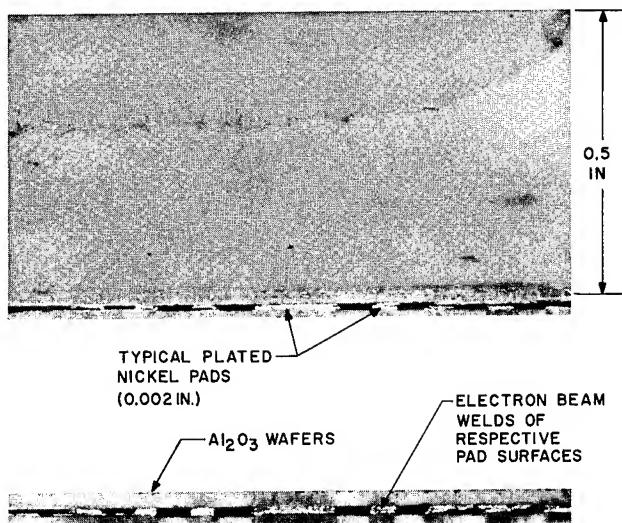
Electron beam welding of electroplated nickel alumina wafers.
